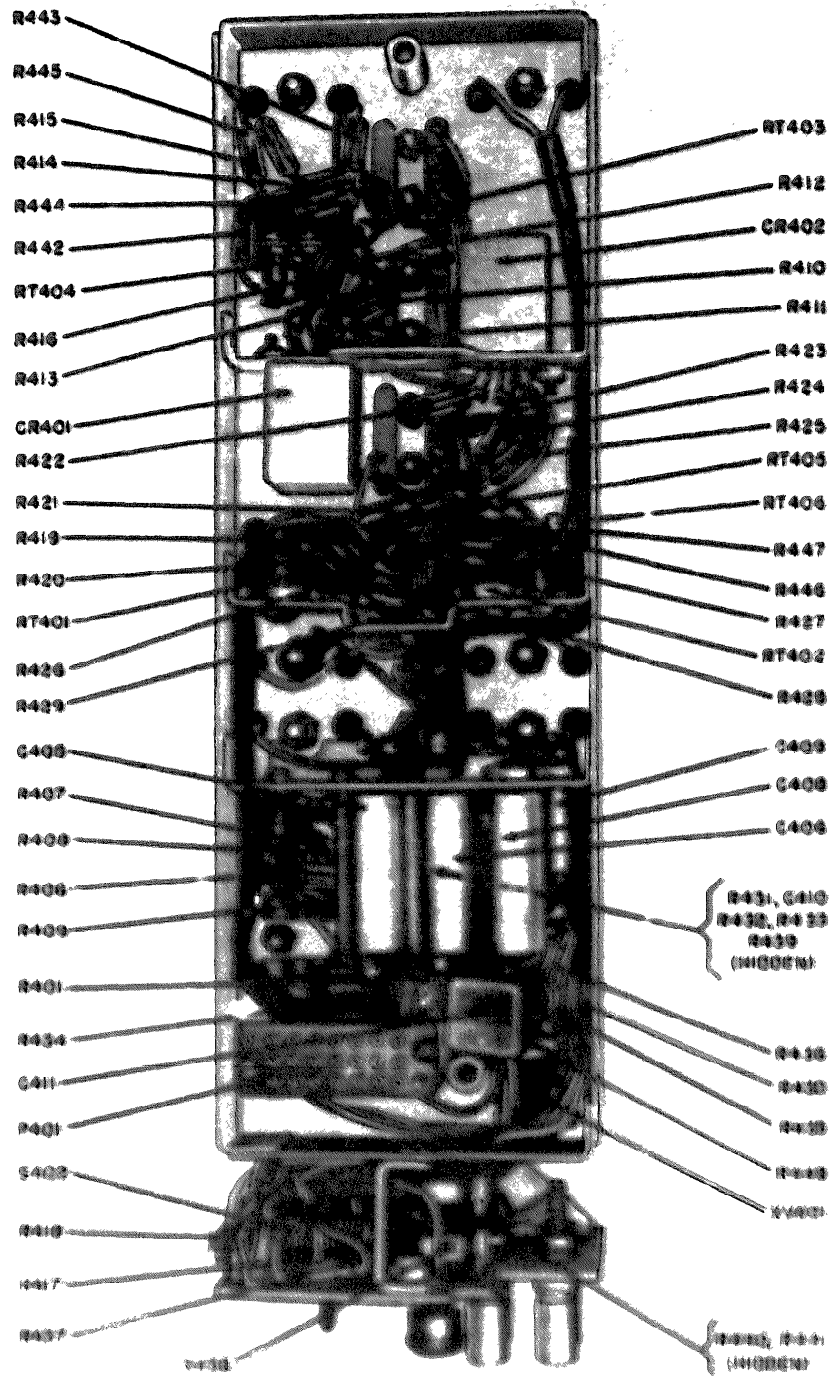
Channel P modem plug-in assembly, bottom view, generic electronic location diagram.
